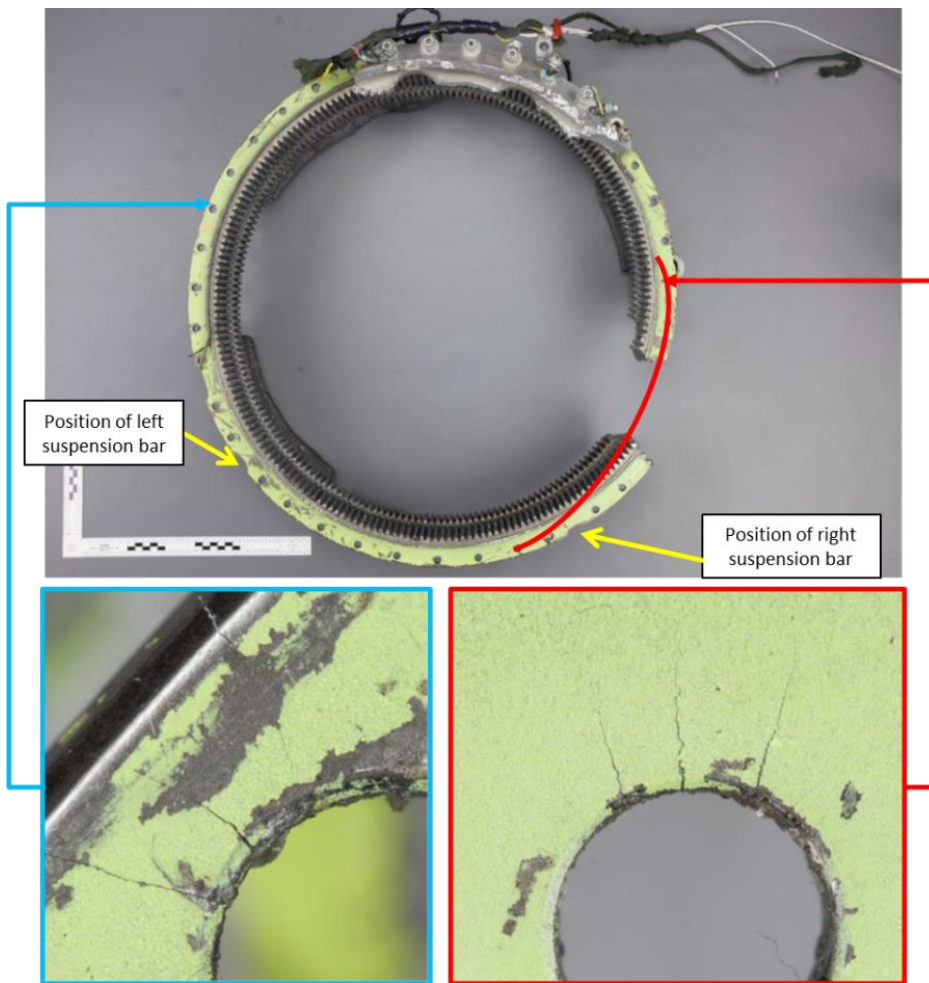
Epicyclic ring gear. Cracks at fastener holes suggests flange of conical housing were intact when fixed ring split and moved outwards. Photo: AIBN/QinetiQ
